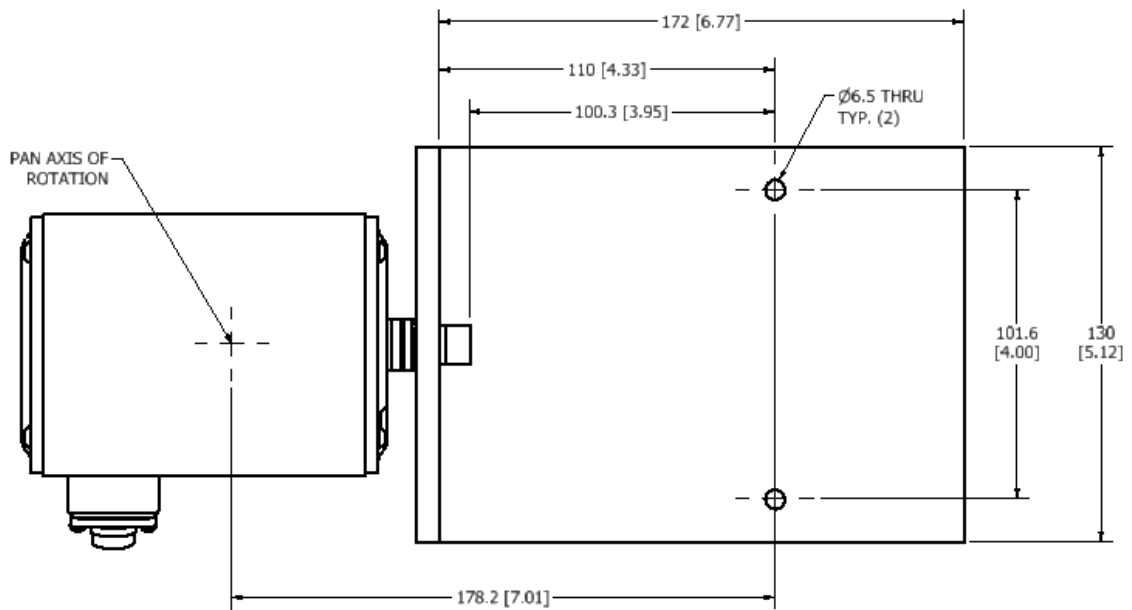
AP-8 Side Mount - Payload Mounting Pattern
